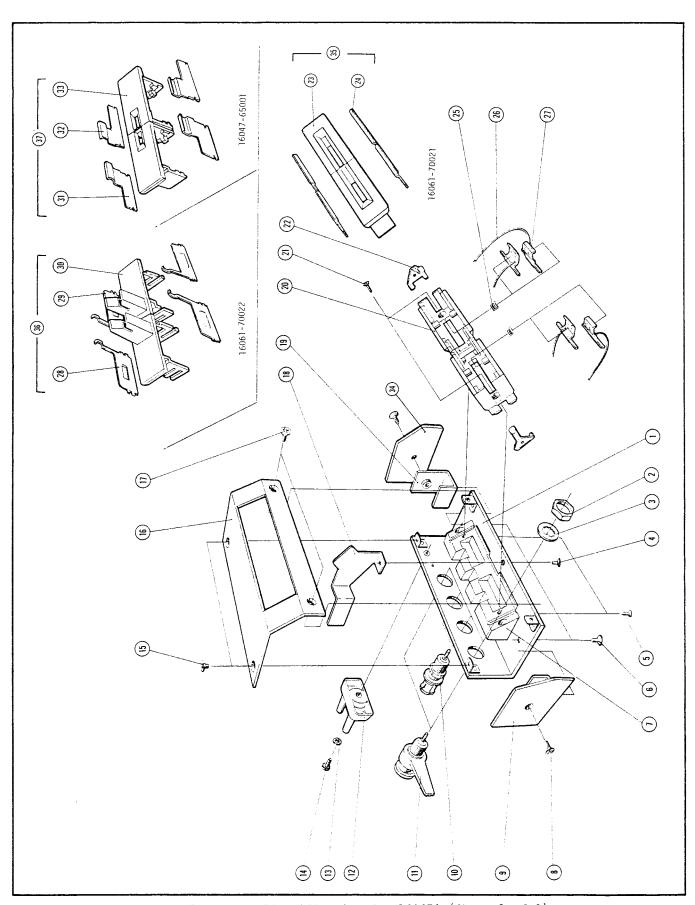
Parts Identification for 16047A (Sheet 1 of 2).
